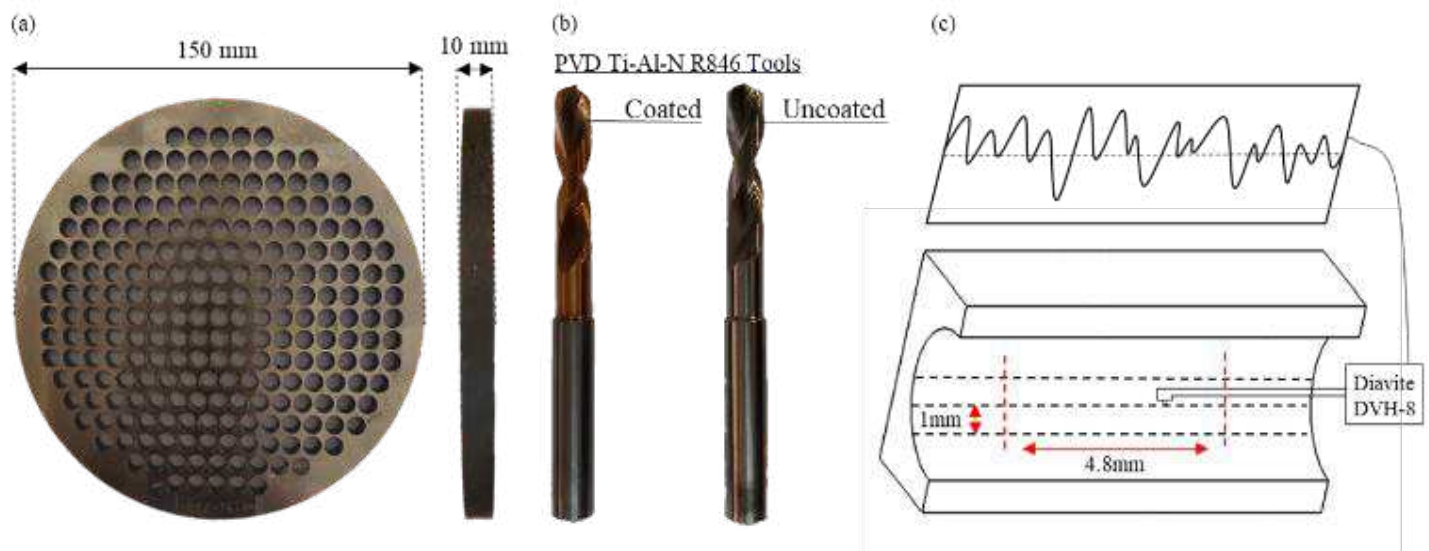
(a) Dimensions of drilled Ti-5553 plates. (b) Ti-Al-N PVD R846 Coated and Uncoated Tools (c) Surface roughness line scan locations
